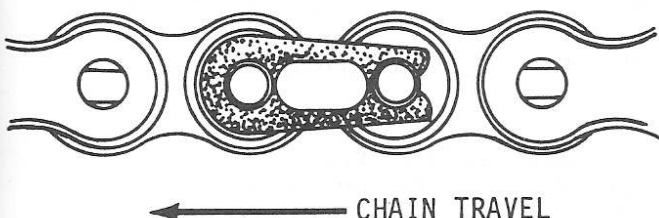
Install the master link clip as shown. Note that closed end of clip should be toward direction of chain travel.
